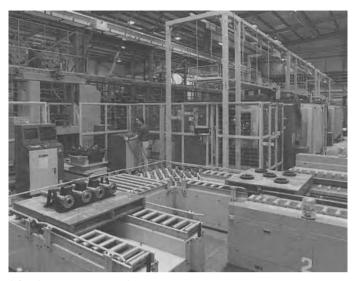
An AGV delivering parts ready for palletising into pallet store for the rotational parts line. [Courtesy of Yamazaki Mazak Ltd.]
